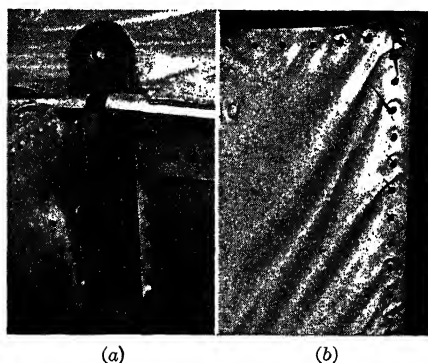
Types of failures in riveted joints. (a) Tearing and shear of sheet, (b) tension and crushing of sheet.
